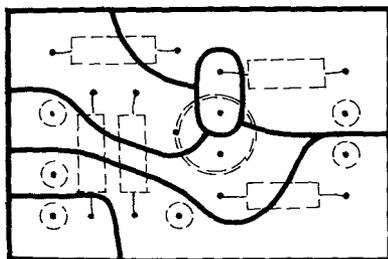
Typical breadboard fabricated directly from engineering sketch.
